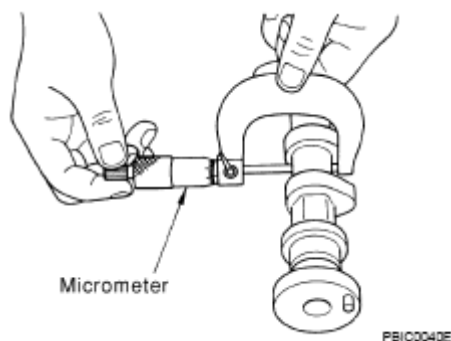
Measuring Outer Diameter Of Camshaft Journal
